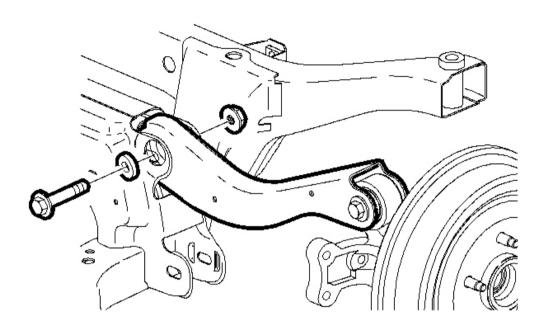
Rear Axle Upper Control Arm, Support Nut & Bolt Courtesy of GENERAL MOTORS CORP.
